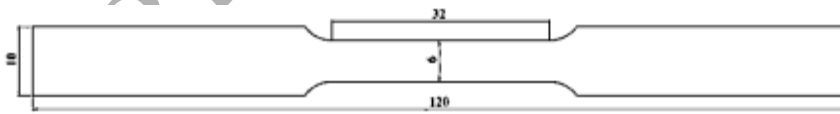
Geometry of the uniaxial tensile specimen. All dimensions are in millimeters.
